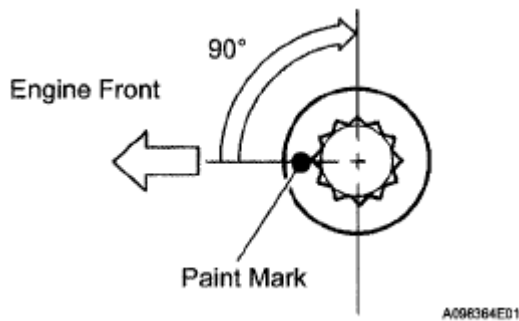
Identifying Paint Mark On Cylinder Head Bolts
